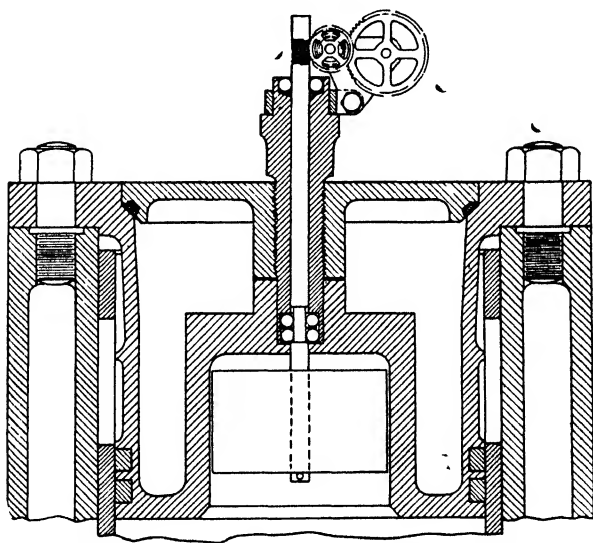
RICARDO SWIRL METER APPLIED TO ENGINE WITH VORTEX COMBUSTION CHAMBER.
